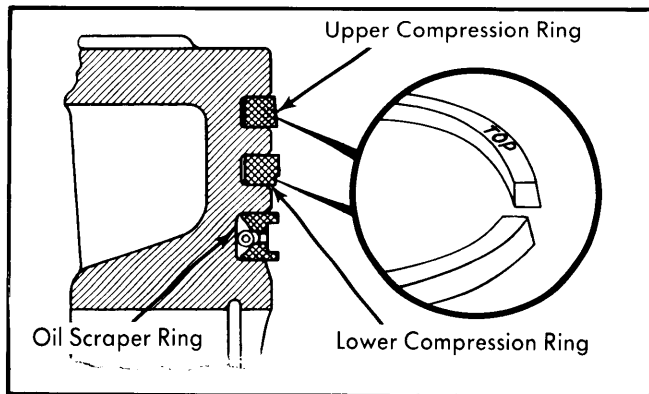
Piston Ring Installation — Word TOP Must Face Piston Crown
